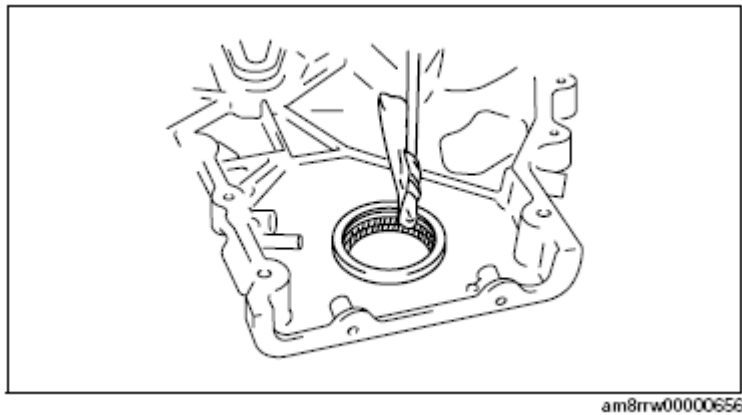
Removing Oil Seal Using Flat Head Screwdriver
